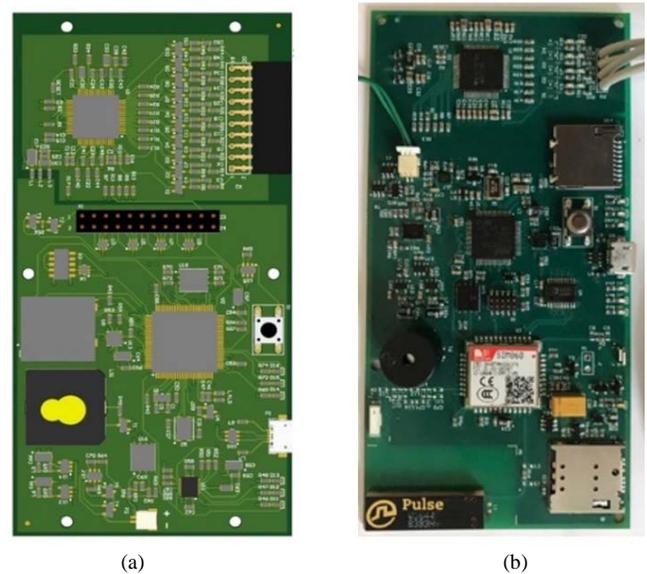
3D Model (a) and Fabricated Sample (b) PCB with Installed Components.
